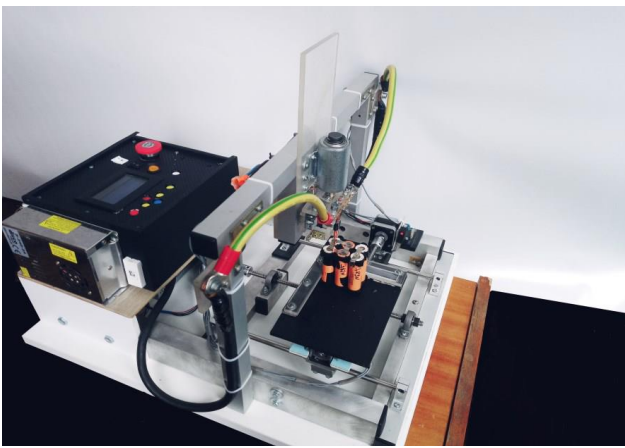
Automatic spot welding machine for 18650 battery cell packaging.
